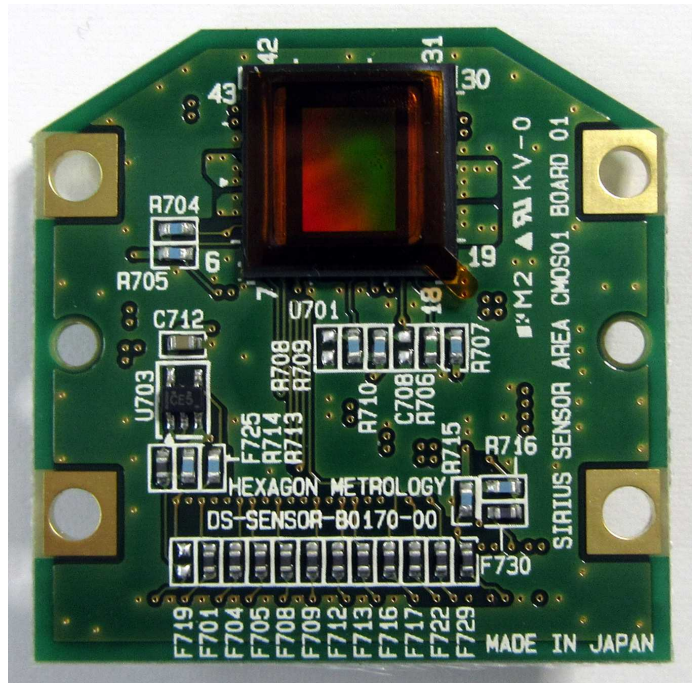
DS-SENSOR-B0170-00_PCB_Photo_PartsSIDE
